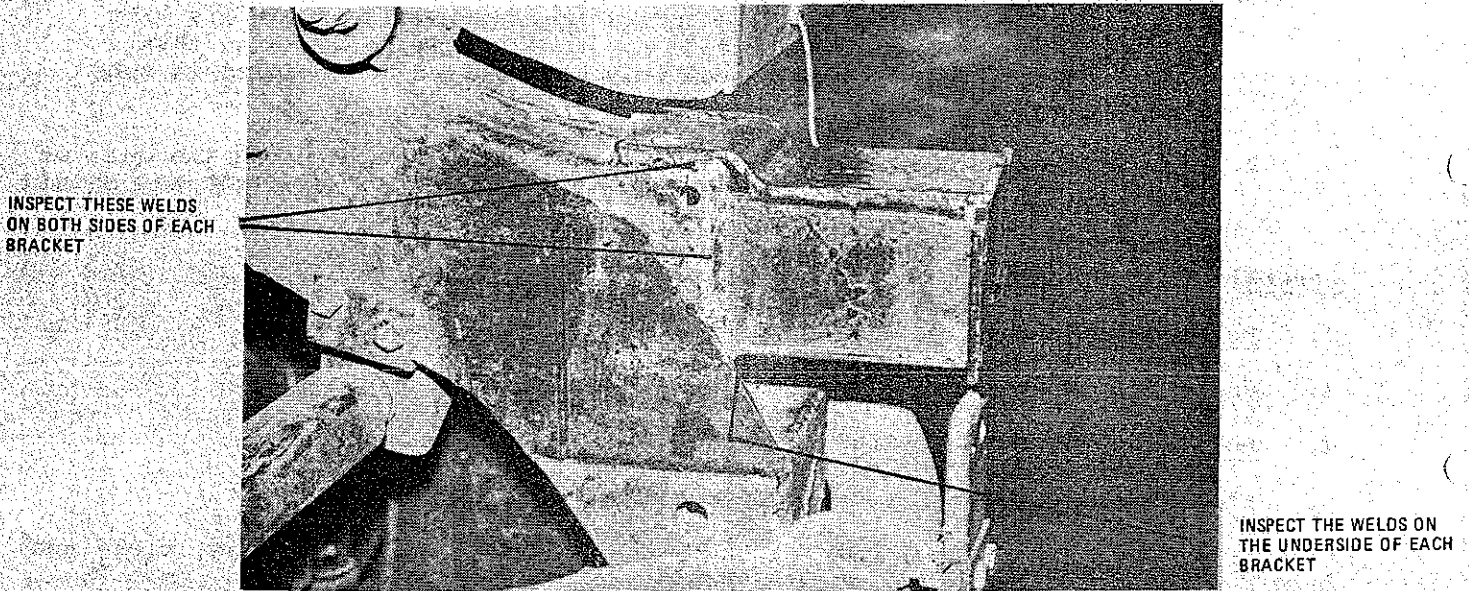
LH BUMPER BAR MOUNTING BRACKET
